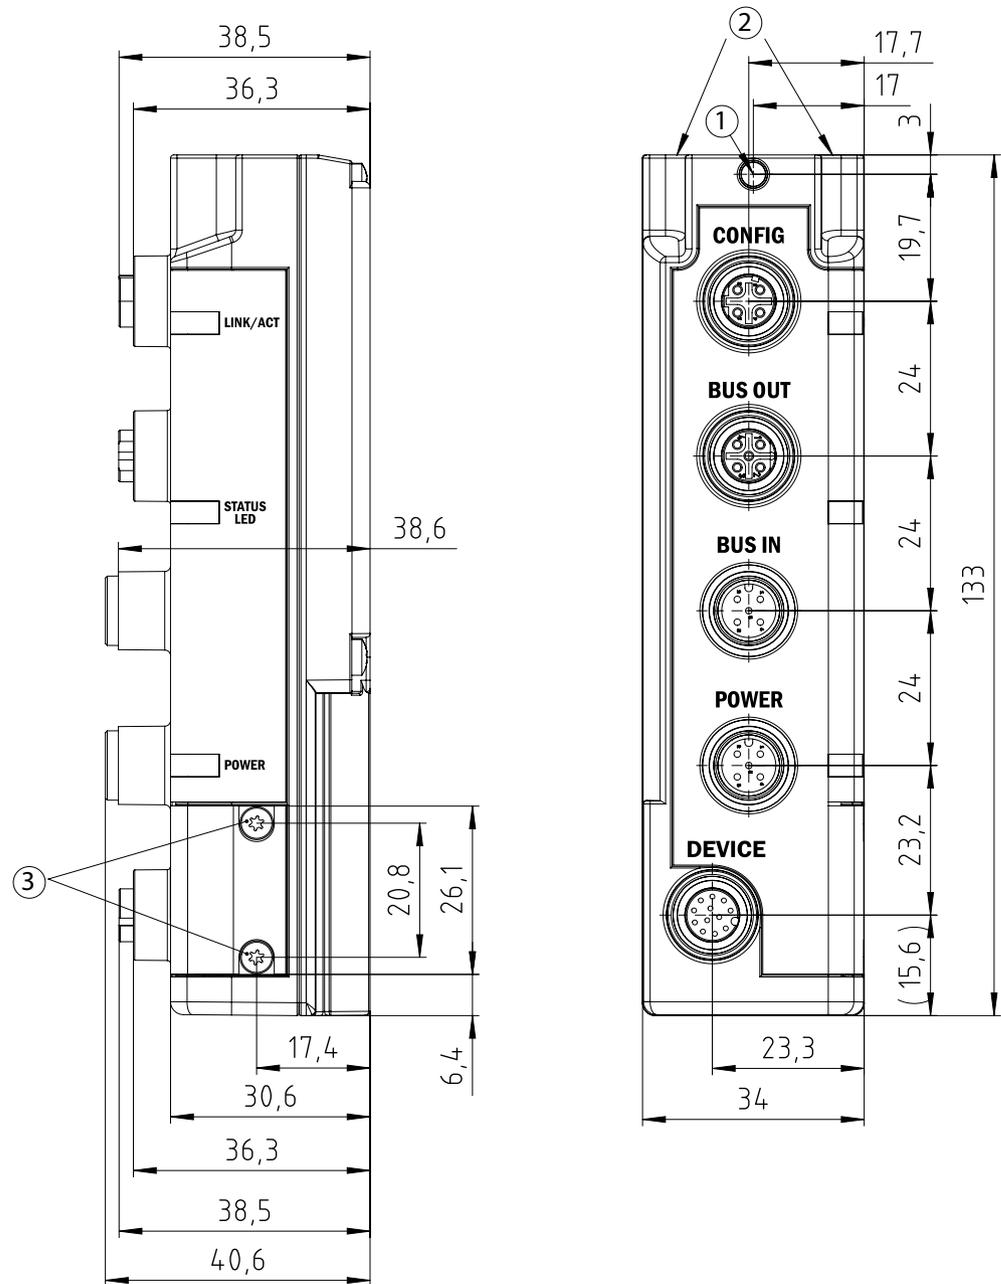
Dimensional drawing 2 MLG-2 fieldbus module
